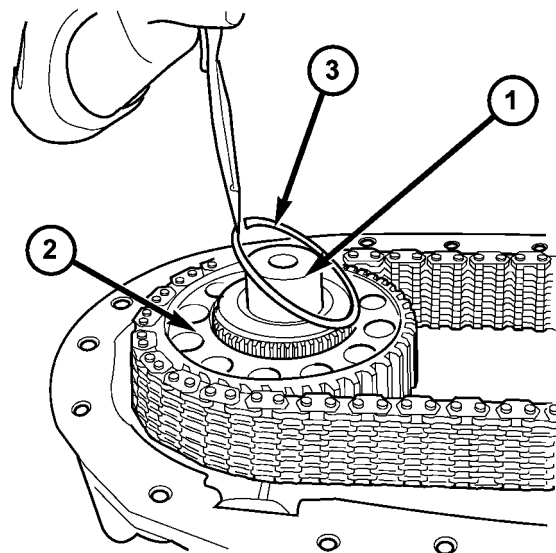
Install Front Output Shaft Bearing Inner Snap-Ring
